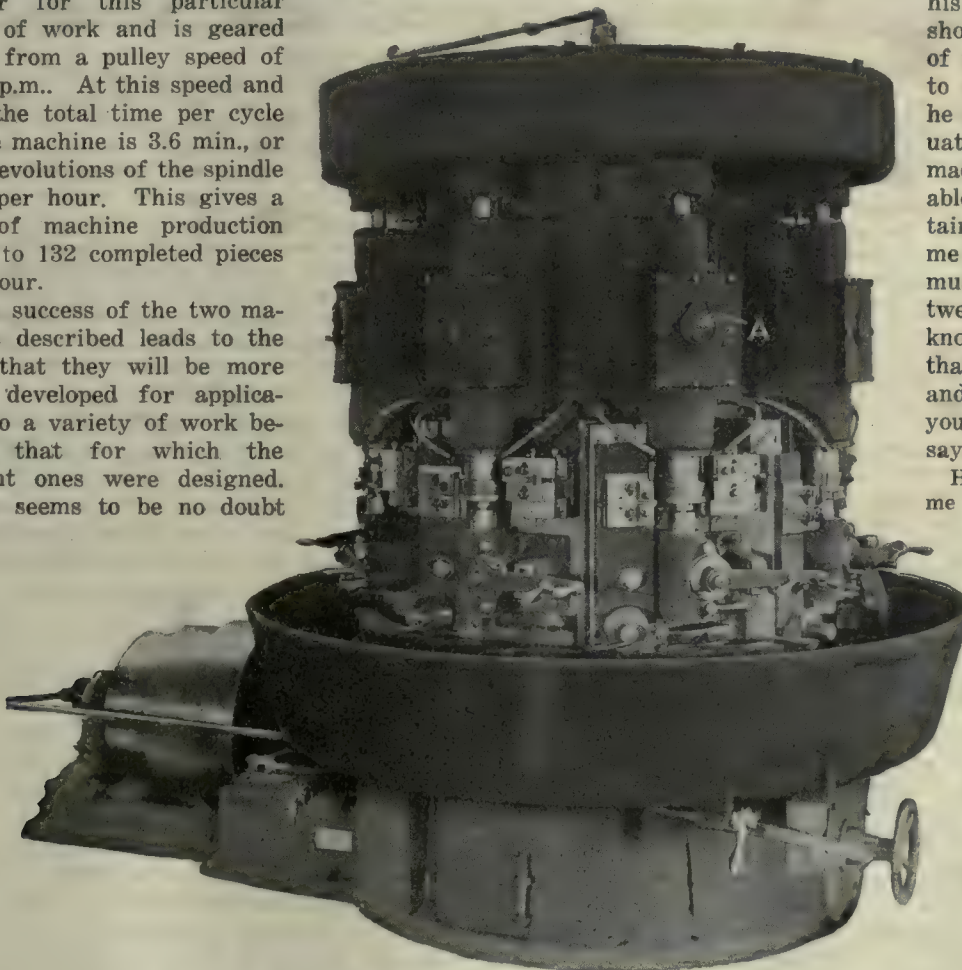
SIDE VIEW OF CONTINUOUS TURNING AND FACING MACHINE
